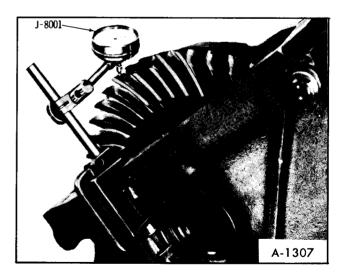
Checking Ring Gear to Pinion Gear Backlash
